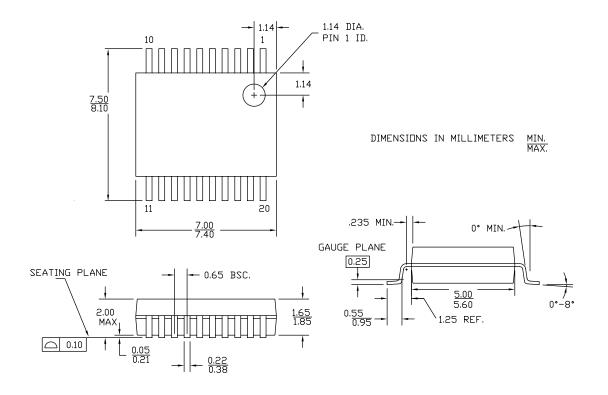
20-pin SSOP (210 Mils) O20.21 Package Outline, 51-85077
